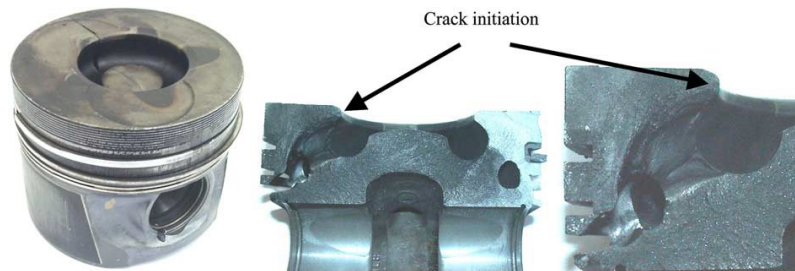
Engine piston with cracks formed at the combustion bowl rim. [30]
